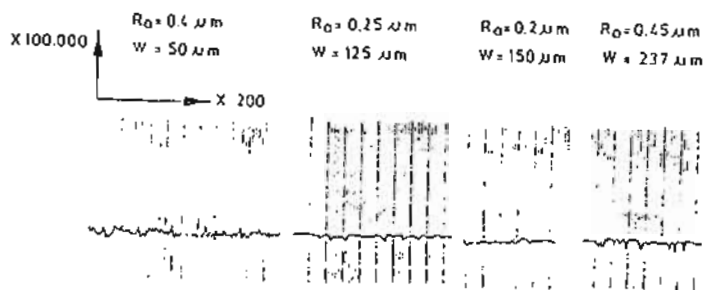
Reproduction of actual Talysurf records when using different minor flank wear widths of THR tool at cutting speed 176 m/min. and feed 0.1 mm/tooth.
